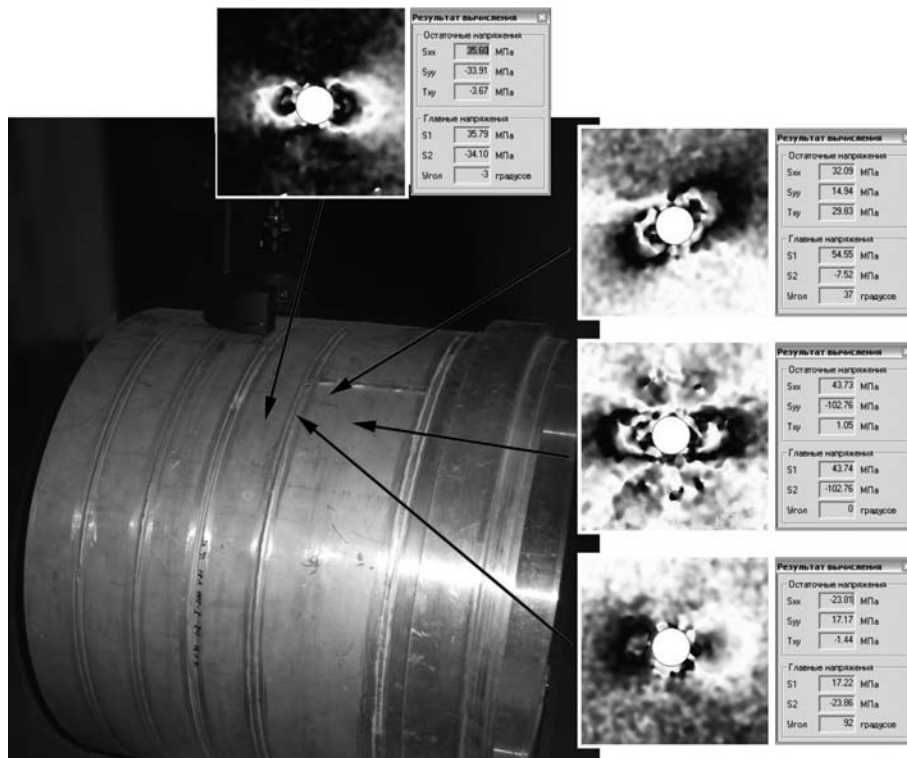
General view of welded aluminium shell and interference fringe pattern
